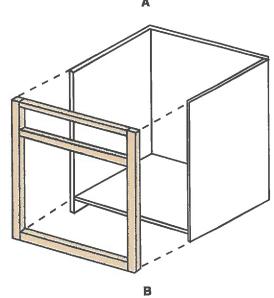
A—This wall cabinet was constructed with face frame casework. B—The frame is attached with glue and/or mechanical fasteners.
